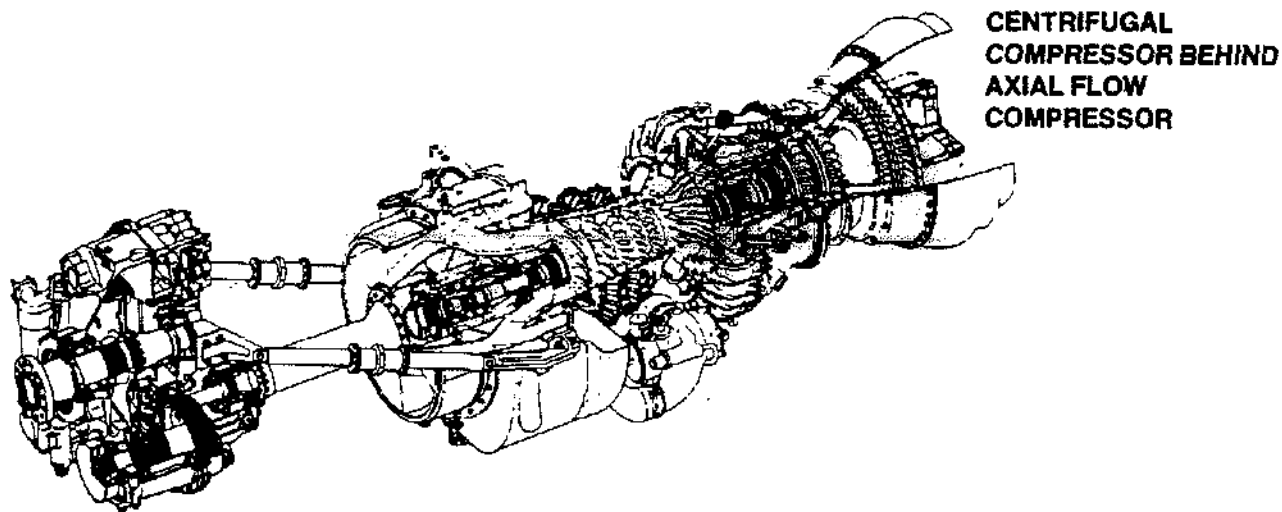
CT7 Engine Incorporating a Centrifugal Compressor
